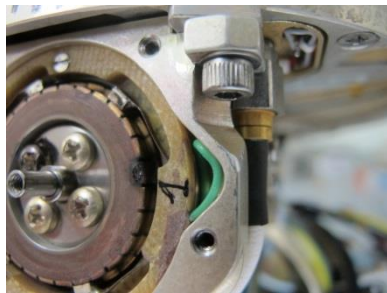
Damaged commutator's surface in an assembled Motor with brush-ring.
